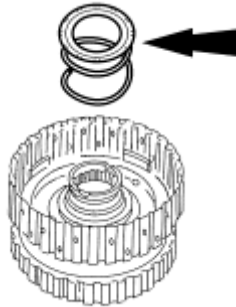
Forward/Coast Clutch Return Spring Assembly
